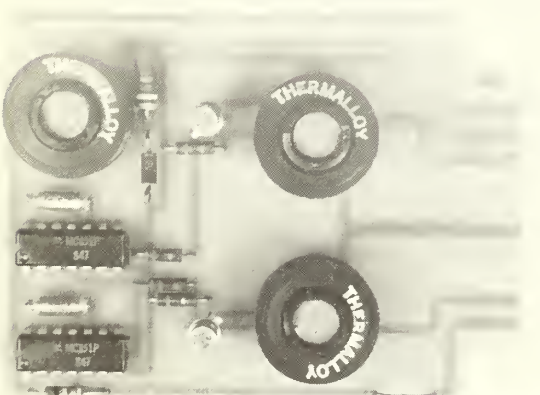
The printed circuit board layout used in the Rocky Mountain integrator:
